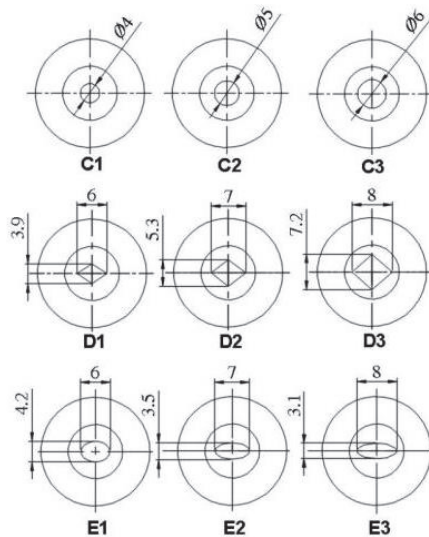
Schematic diagram (right view) of the investigated non-circular nozzles with dimensions (mm).
